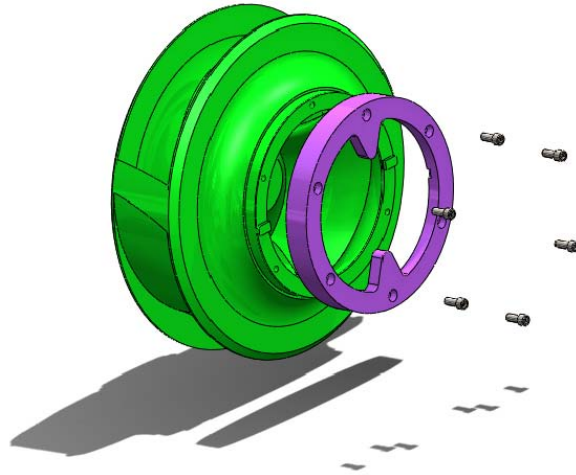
Register and Bolt Rotating Cutter Ring to Impeller
